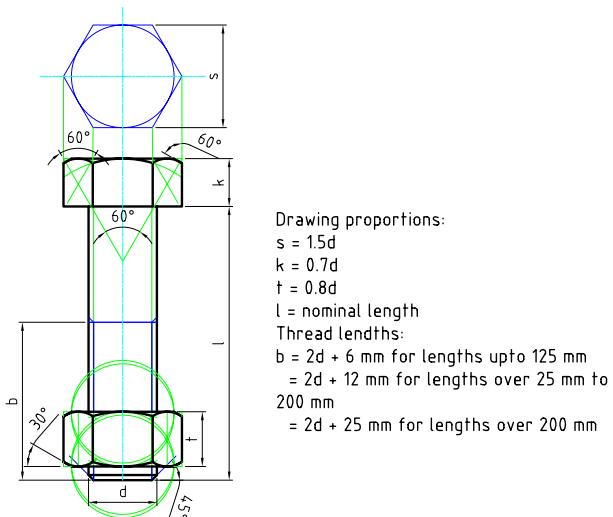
Front and side view of a hexagonal bolt and nut assembly
